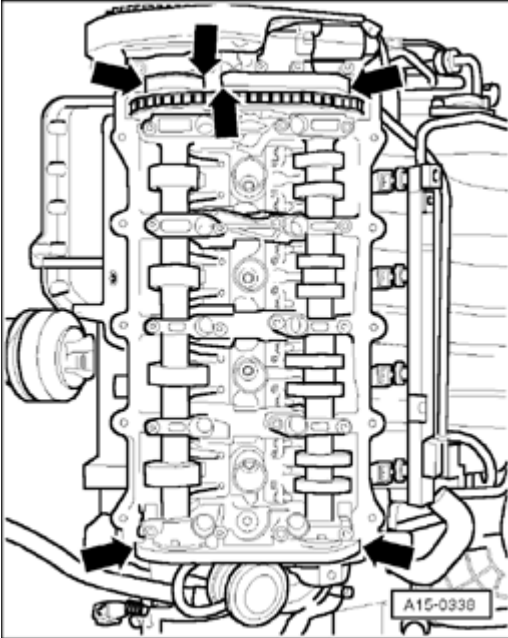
Applying Thin Layer Of Sealant To Edges Of Sealing Surfaces Between Bearing Cap And Cylinder Head
